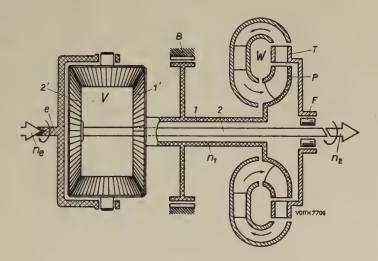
Diagram of the arrangement of the differential converter transmission. V distribution gear divider; W torque converter; B distributor brake; P pump impeller; T turbine runner; L guide vanes; F free wheel; e input shaft; I primary (hollow) shaft; I outpunt shaft. Figure taken from the article « Das Voith-Diwabus-Getriebe » (The Voith-Diwabus transmission), by Dr. Ing. Wilhelm GSCHING, which appeared in « Automobil-technische Zeitschrift », 1953, No. 3; block by courtesy of Voith Company, Heidenheim.
